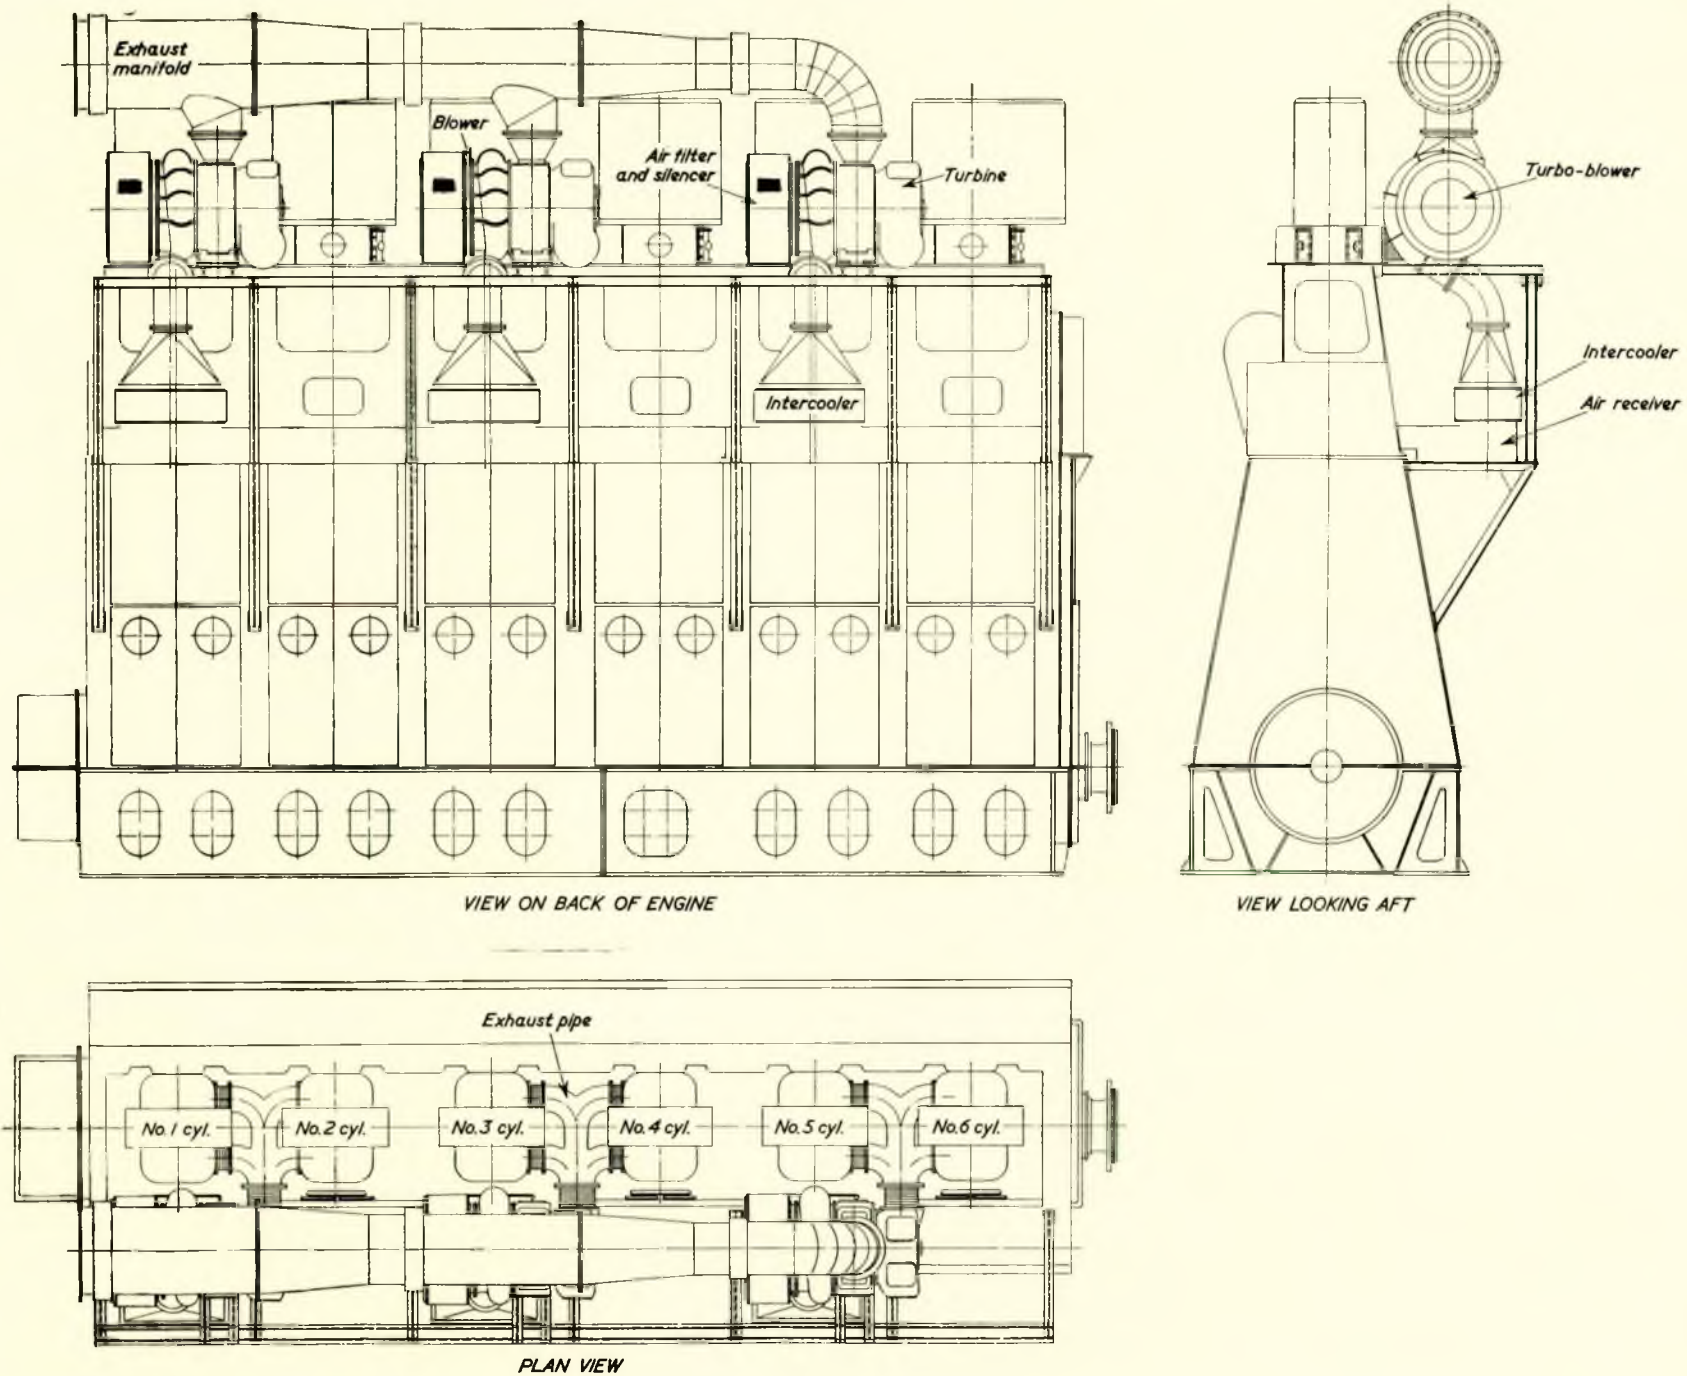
Arrangement of the six cylinder engine with three turboblowers
